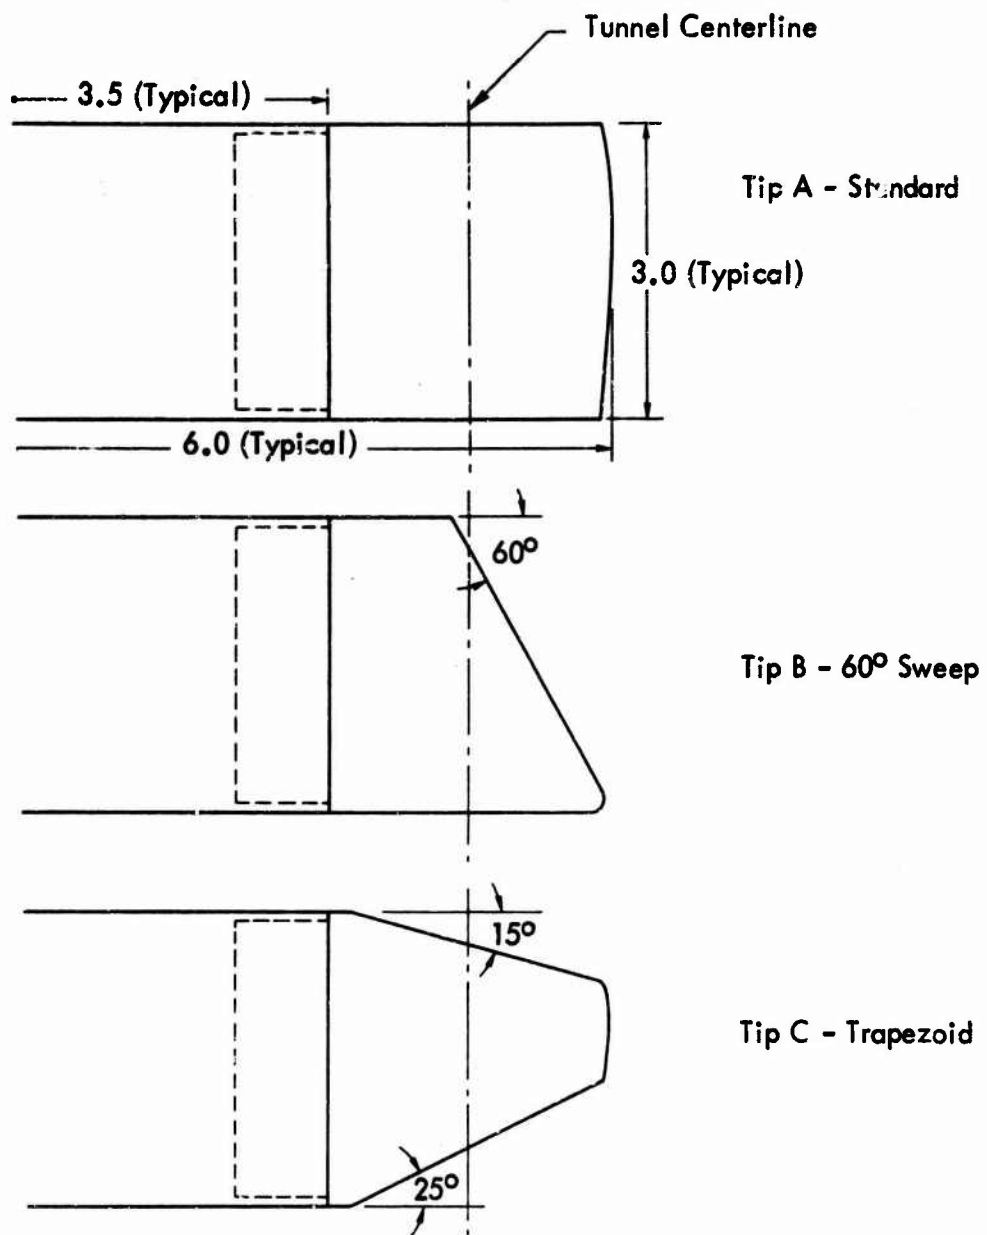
Plan View of Wind Tunnel Blade Configurations,
